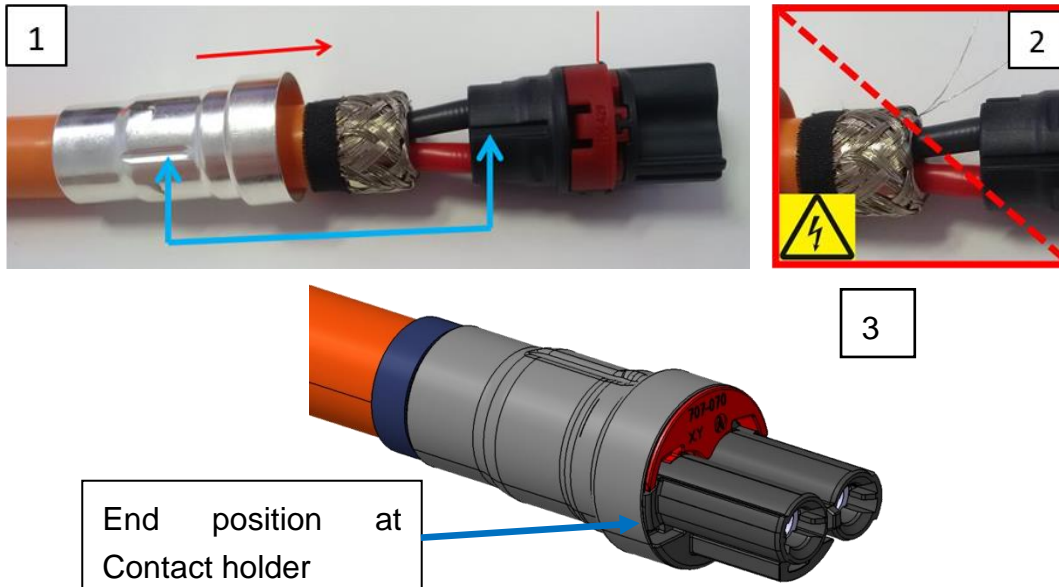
(1) Assembly of Shield-Sleeve, (2) Warning notice, (3) Shield-Sleeve in end position
